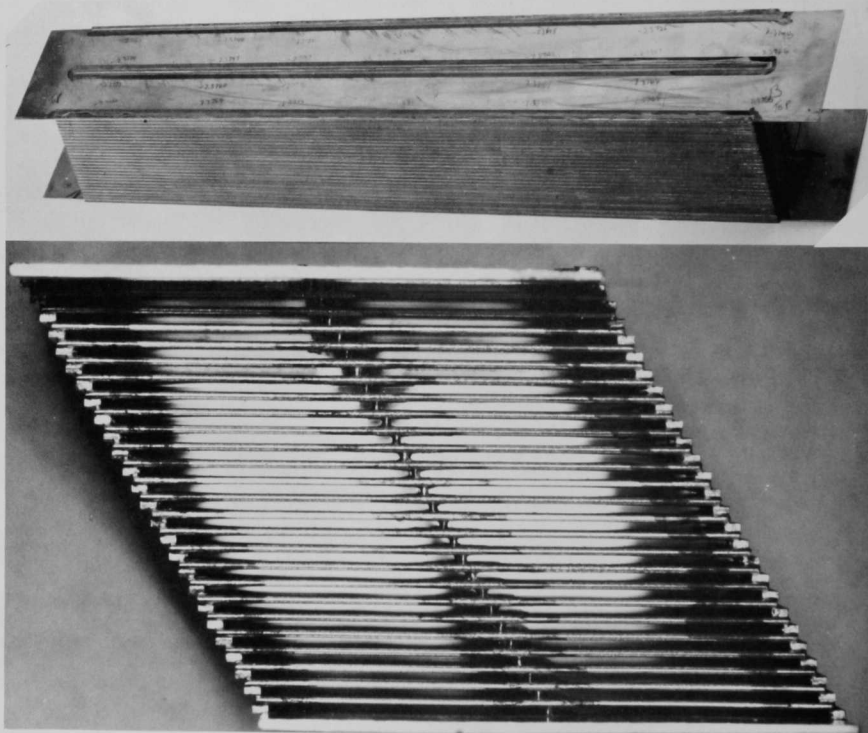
Side and End Views of Assembly No. S/N 452-IA-2, as Brazed
